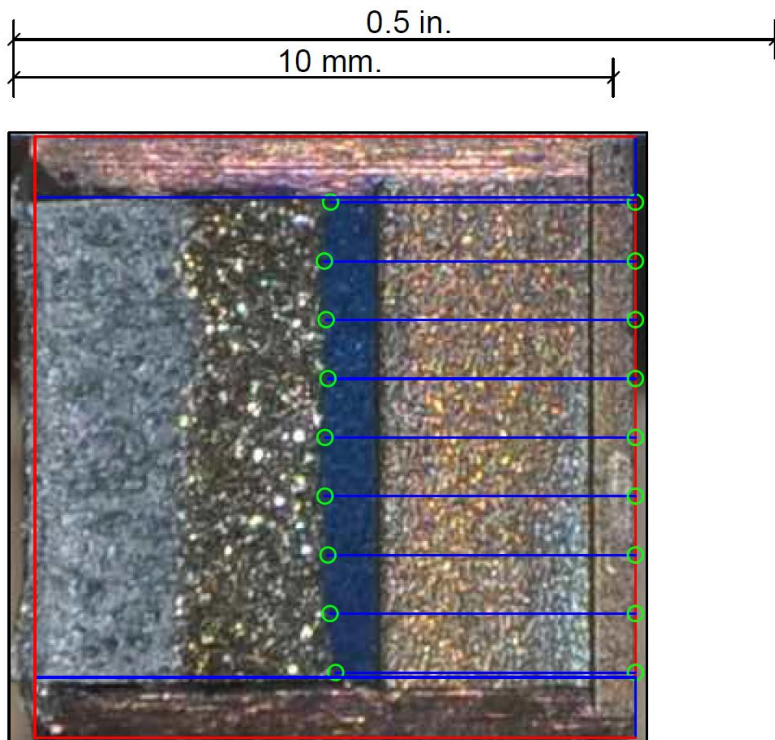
Specimen B15' Fracture Surface
